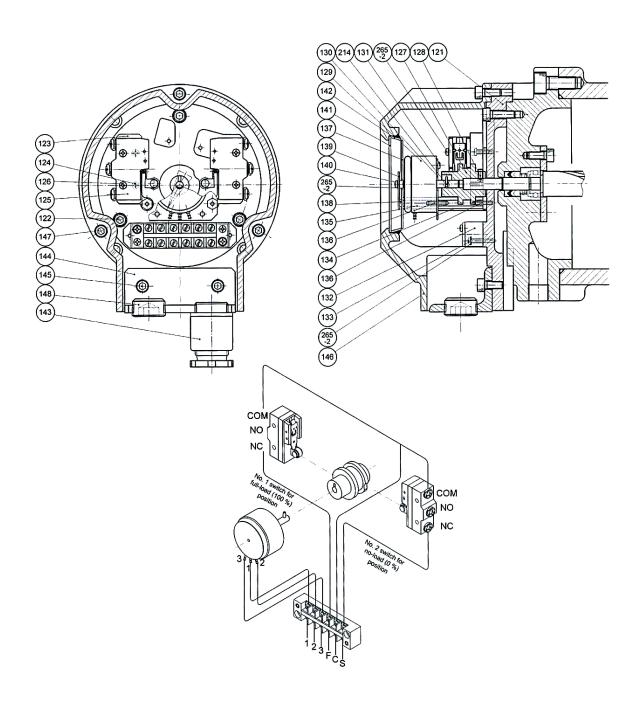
Sectional Views of SCV-series Unloader Indicator (Traditional standard type)
